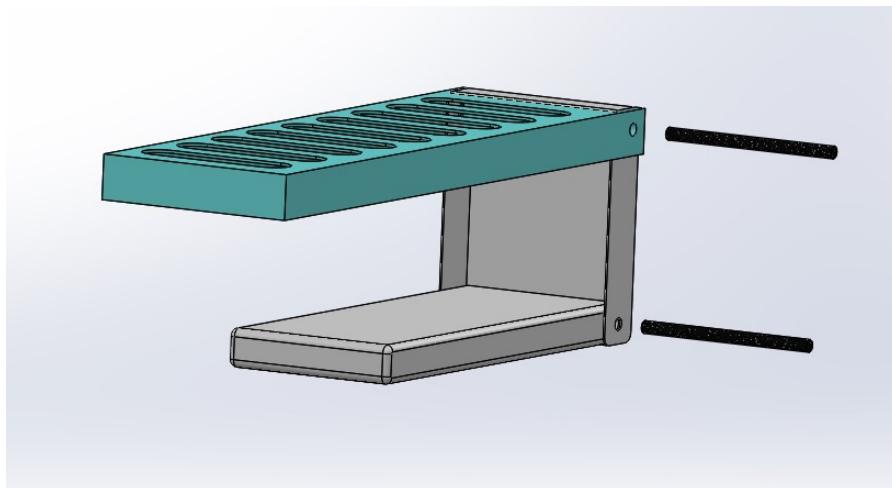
Ferrarer, Auston: Assembly Step 2
